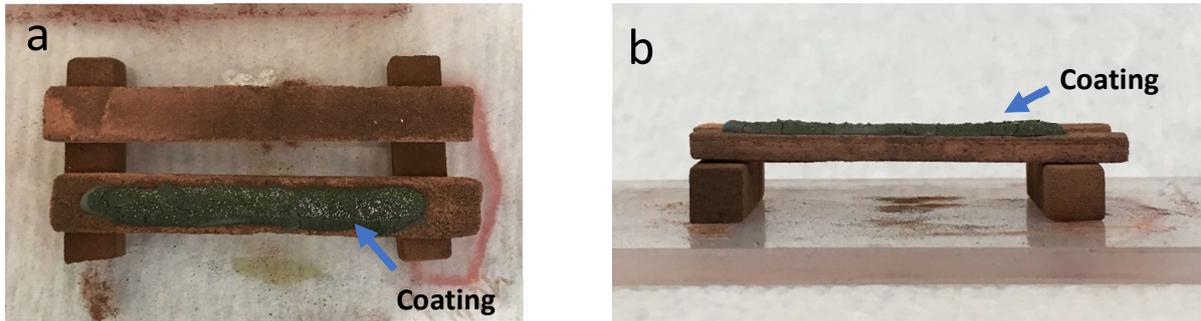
Green parts of dimensions 40x5x2.4 mm were arranged in simply supported configuration. Green parts with and without coating (a) top view, and (b) side view.
